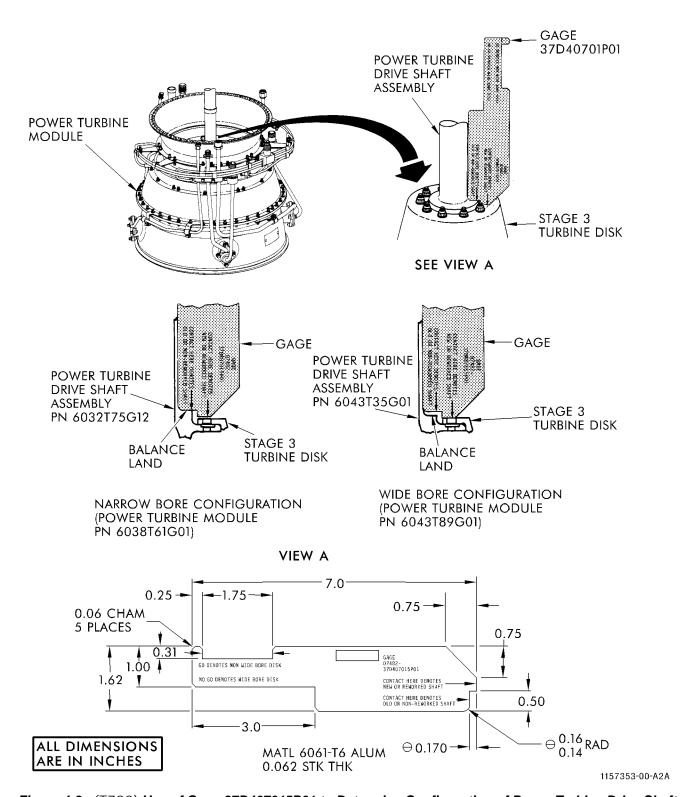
(T700) Use of Gage 37D407015P01 to Determine Configuration of Power Turbine Drive Shaft
